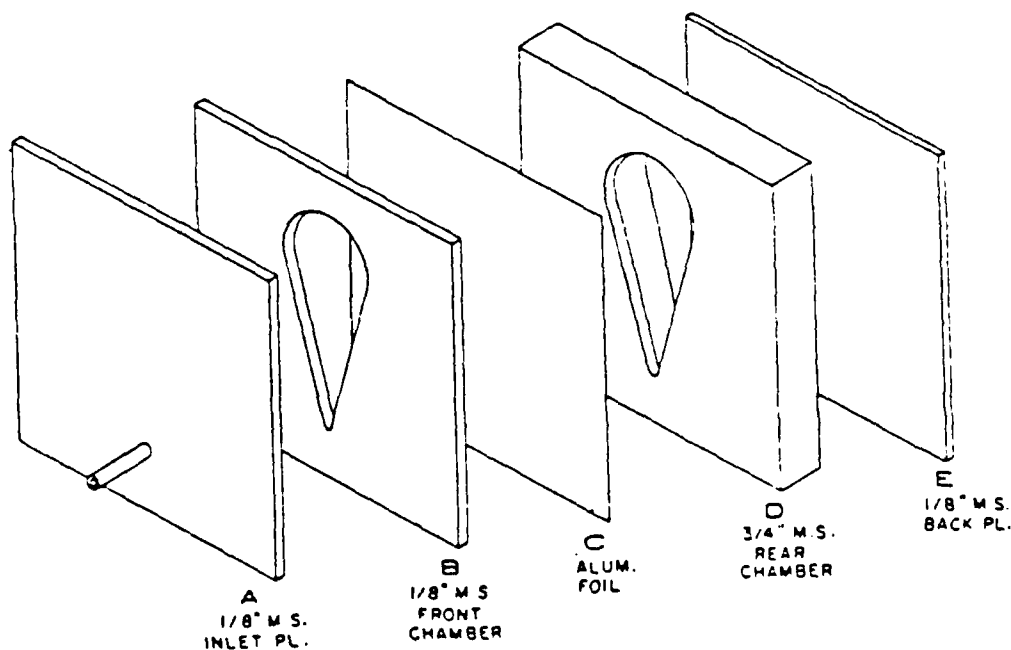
(U) Construction Plan View of the Quasistatic Diaphragm Pressure Gage (QS-DPG) .
